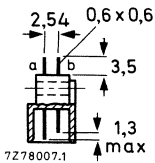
Straight dip-solder pins, with protruding earth contacts.
